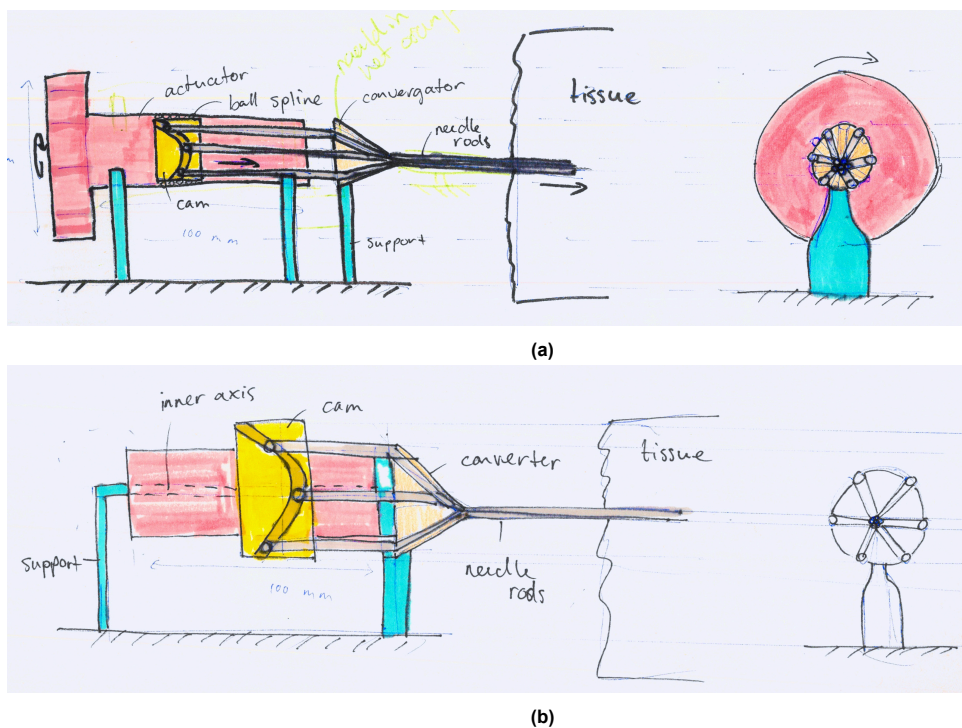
Two most promising design configurations. (a) Configuration B2: the drive (pink) is an outer cylinder, a cam (yellow) is placed inside the drive that can rotate and translate because of grooves and balls between the parts. Needle rods (grey) are connected to the cam and brought together via a cones structure (orange). Support (blue) is placed outside the drive. (b) Configuration A1: the drive (pink) is an inner cylinder, over which a cam (yellow) is placed that can rotate and translate because of grooves and balls between the parts. Needle rods (grey) are connected to the cam and brought together via a cones structure (orange). Support (blue) is placed inside the drive in the form of an inner axis.
